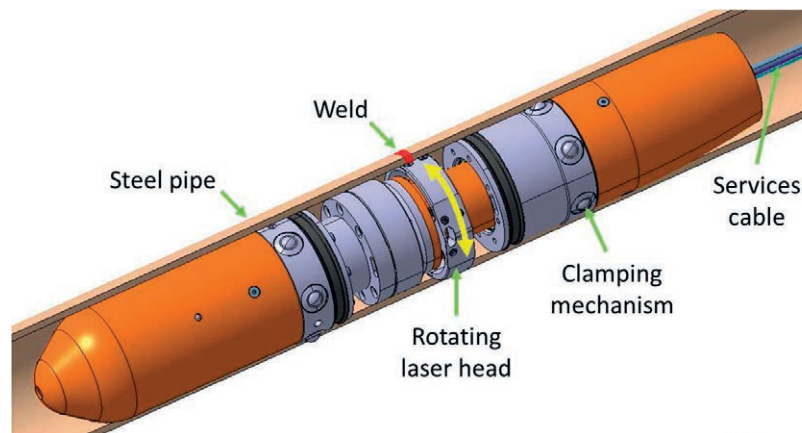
EU DEMO in-bore laser welding tool prototype deployed inside a pipe.
